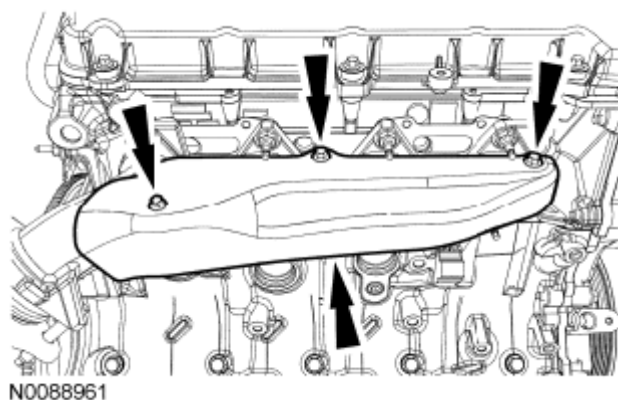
Locating RH Exhaust Manifold Heat Shield And Bolts
